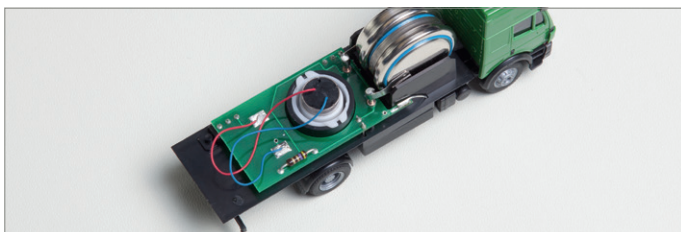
Lorry model with universal PCB, soldered batteries, with wiring
